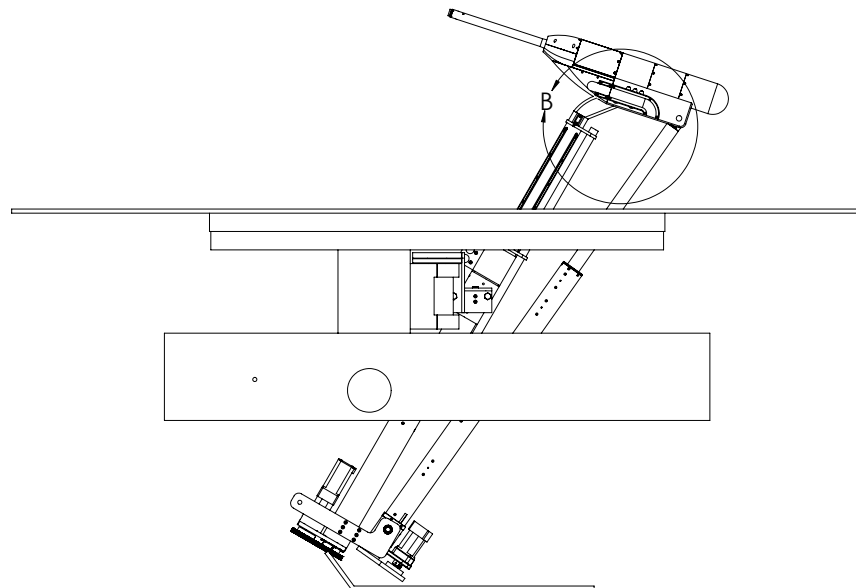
Side view of the HARS mount with the 90 degree block installed.
